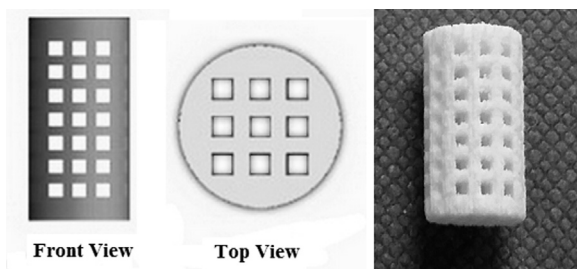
Scaffold design (front and top views) using solidworks and 3D printed specimen.
